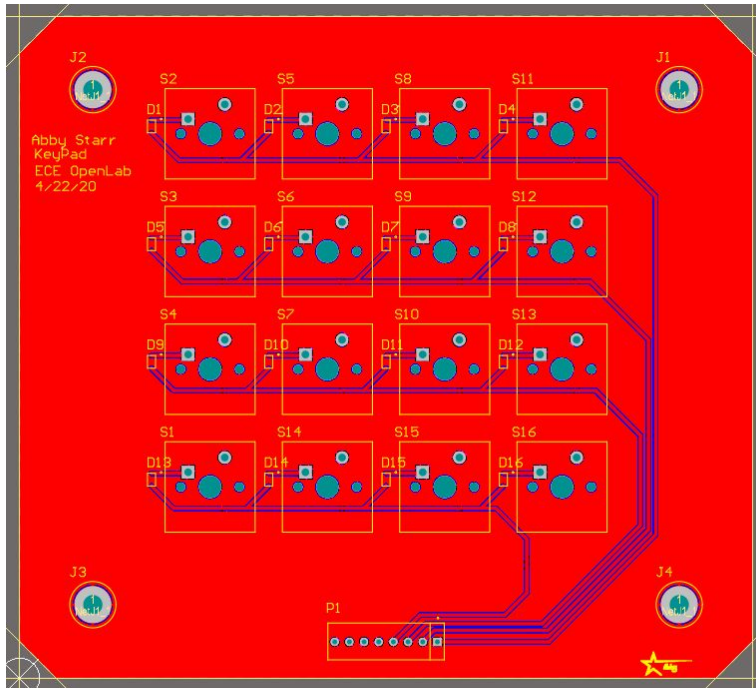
Keypad PCB 2D 2-Layer PCB for the just the keypad portion. Four holes around the outside fit with main micro board to mount together
